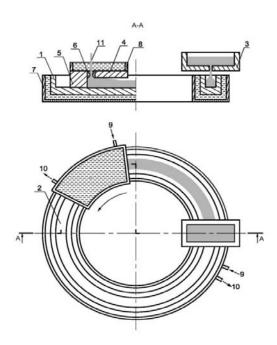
Device for cooling a continuous metal casting-pressing installation tool [17]:
